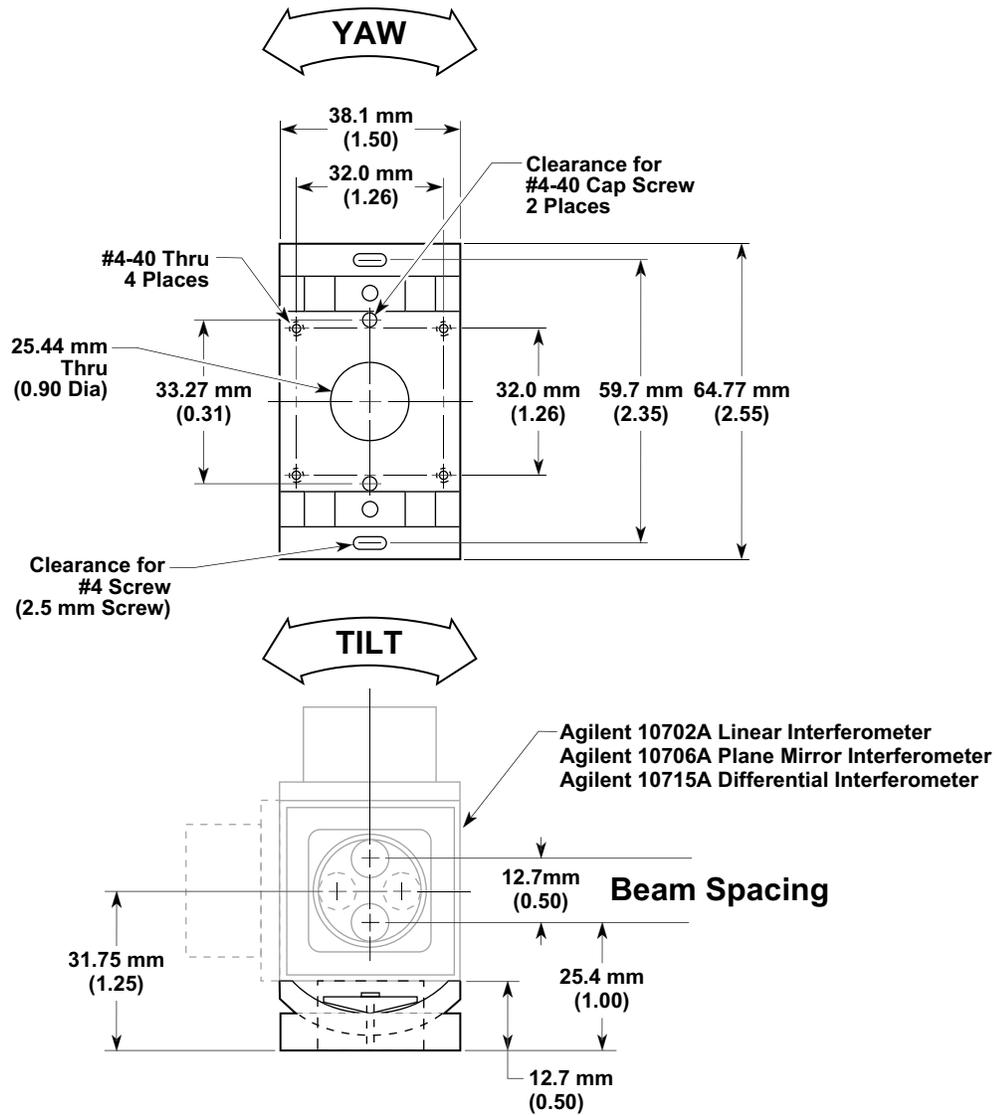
Agilent 10711A Adjustable Mount — dimensions
